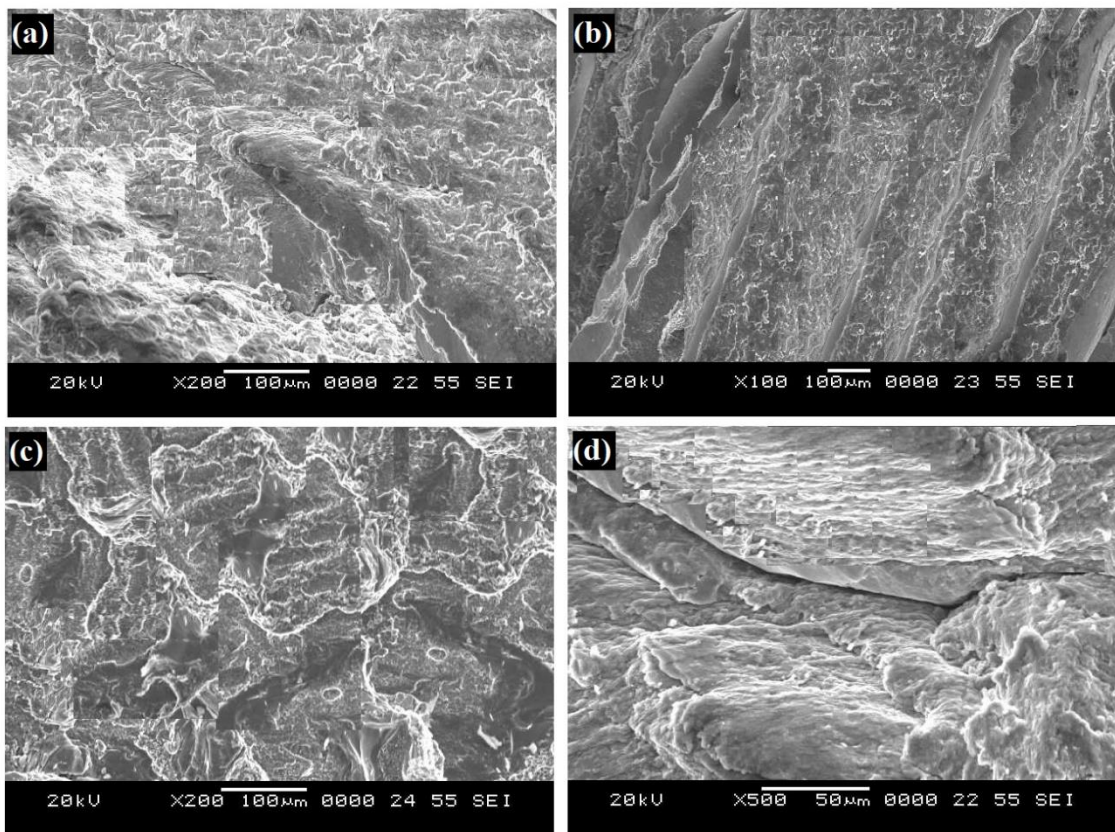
SEM images of tensile fracture surface (tested in the direction of weld) of Al-10Mg-8Ce-3.5Si aluminium alloy joints friction stir welded with CPP tool, at (a) Speed of tool rotation of 1000 RPM and welding speed of 10 mm/min, (b) Speed of tool rotation of 1000 RPM and welding speed of 15 mm/min, (c) Speed of tool rotation of 1000 RPM and welding speed of 20 mm/min, (d) Higher magnification image showing the dimples, pullout, decohesion and cracked AlSiMg particles.
